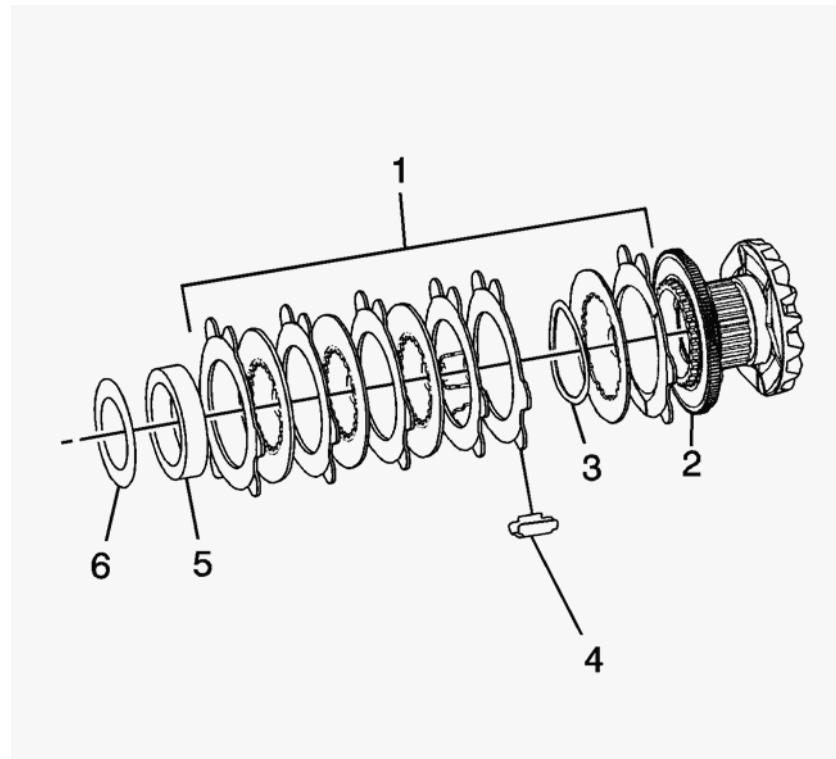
Disassembled View Of Locking Differential Side Gear Components
